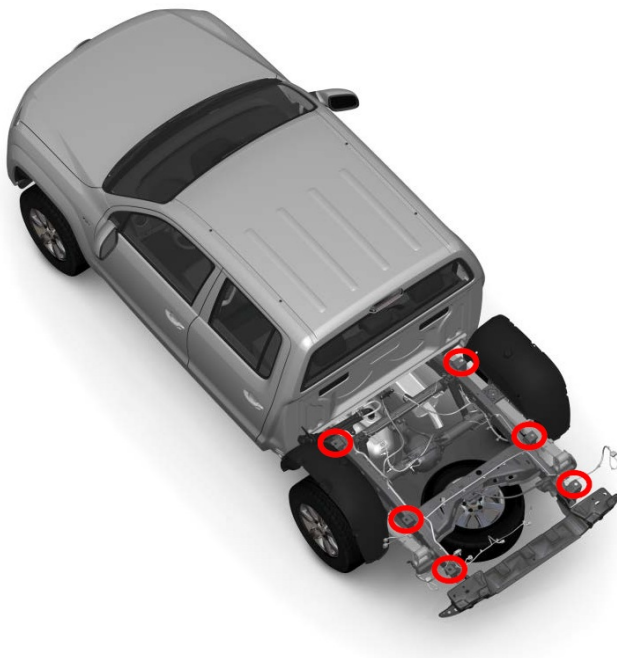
Amarok Double Cab – mounting brackets for cargo box (see red mark)
